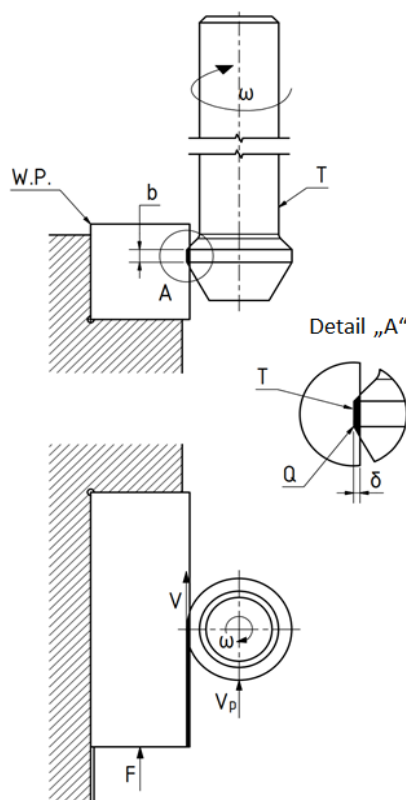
Schematic view of the surface contact rotating tool and workpiece.
